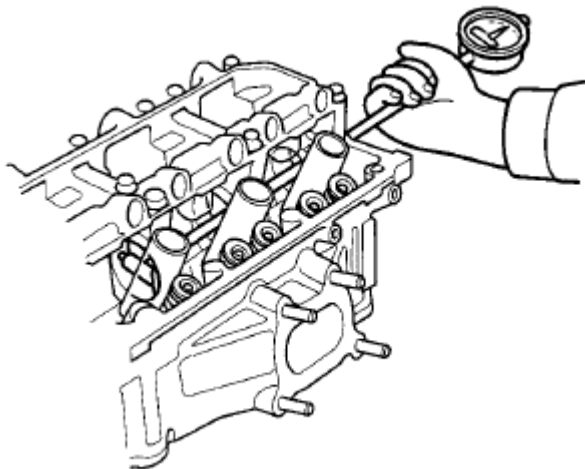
Checking Camshaft-To-Holder Oil Clearance
